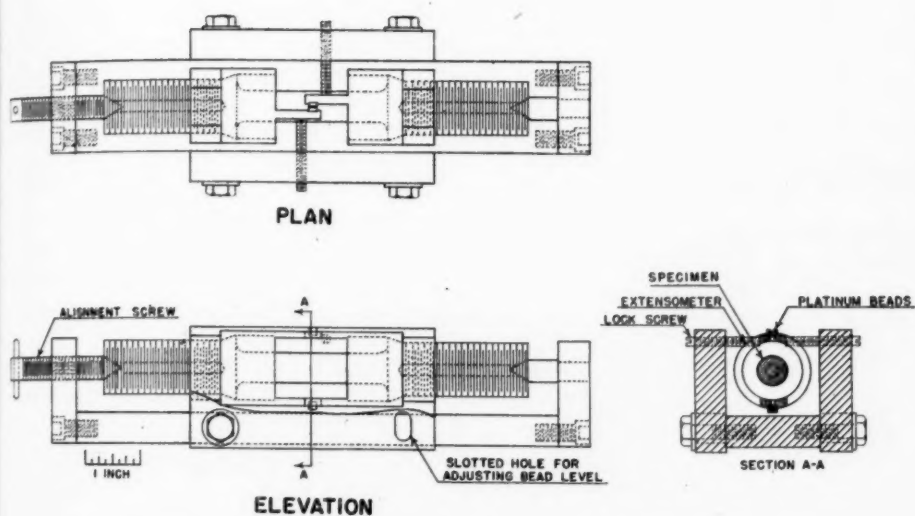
Jig for Polishing Extensometer Units After Mounting on Creep-Test Specimen.
